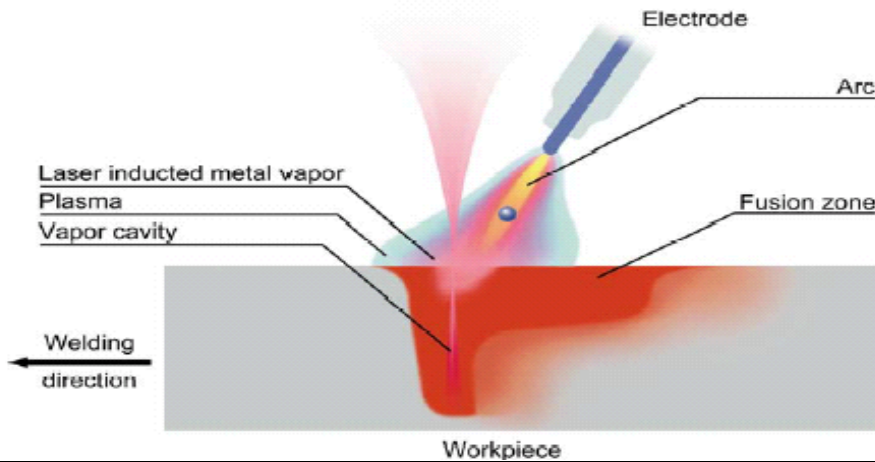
Schematic representation of the Laser/GMAW hybrid welding process
